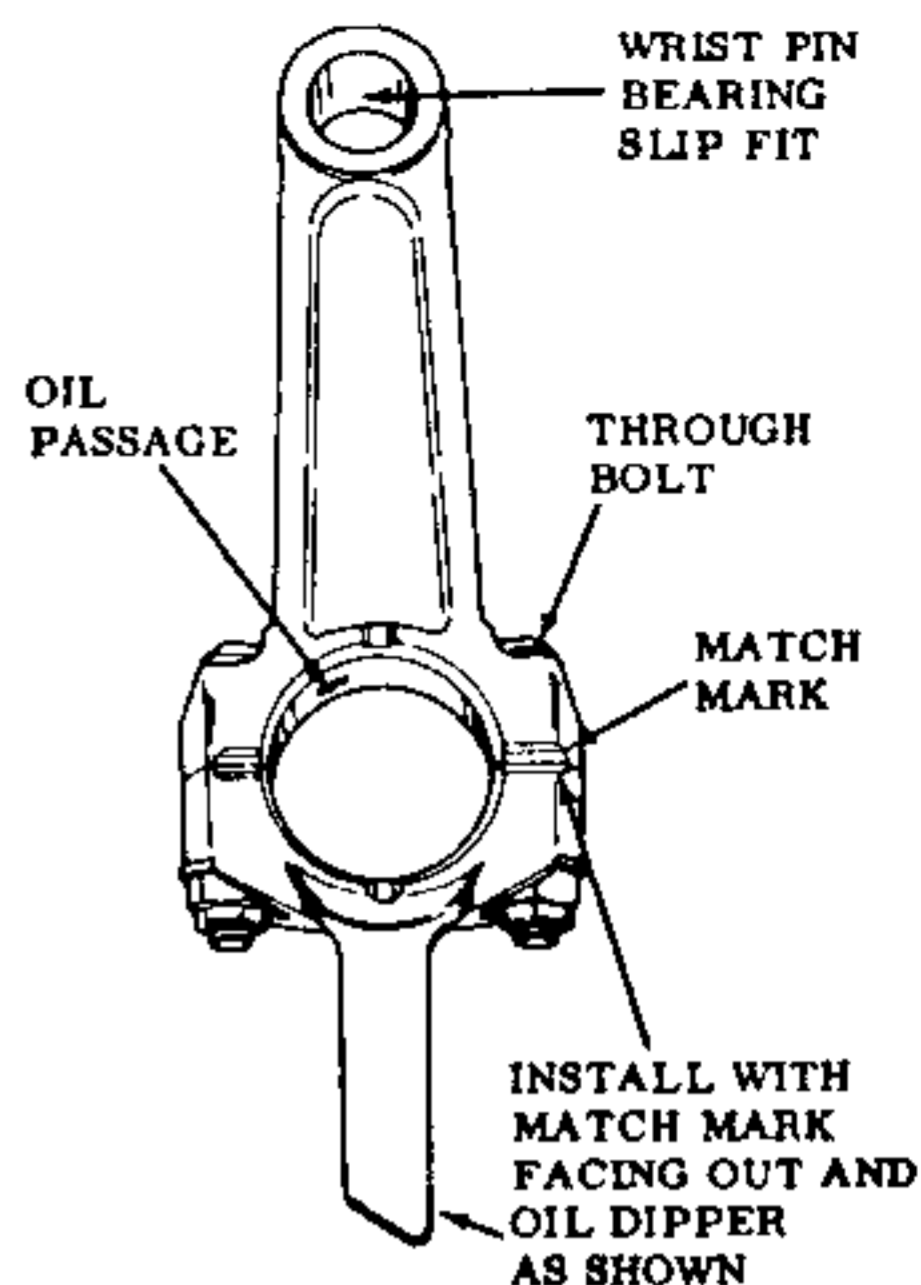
Connecting rod assembly used on all models. Note oil dipper on rod cap and match marks.
